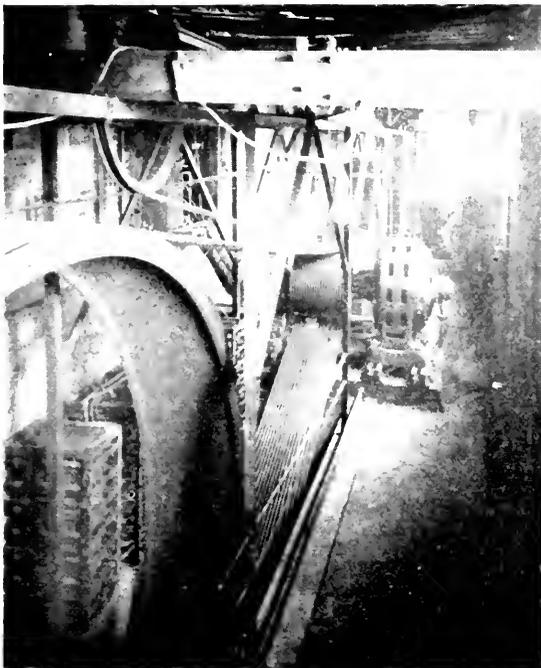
Polishing Table, 400-h.p. Slip-ring Induction Motors
